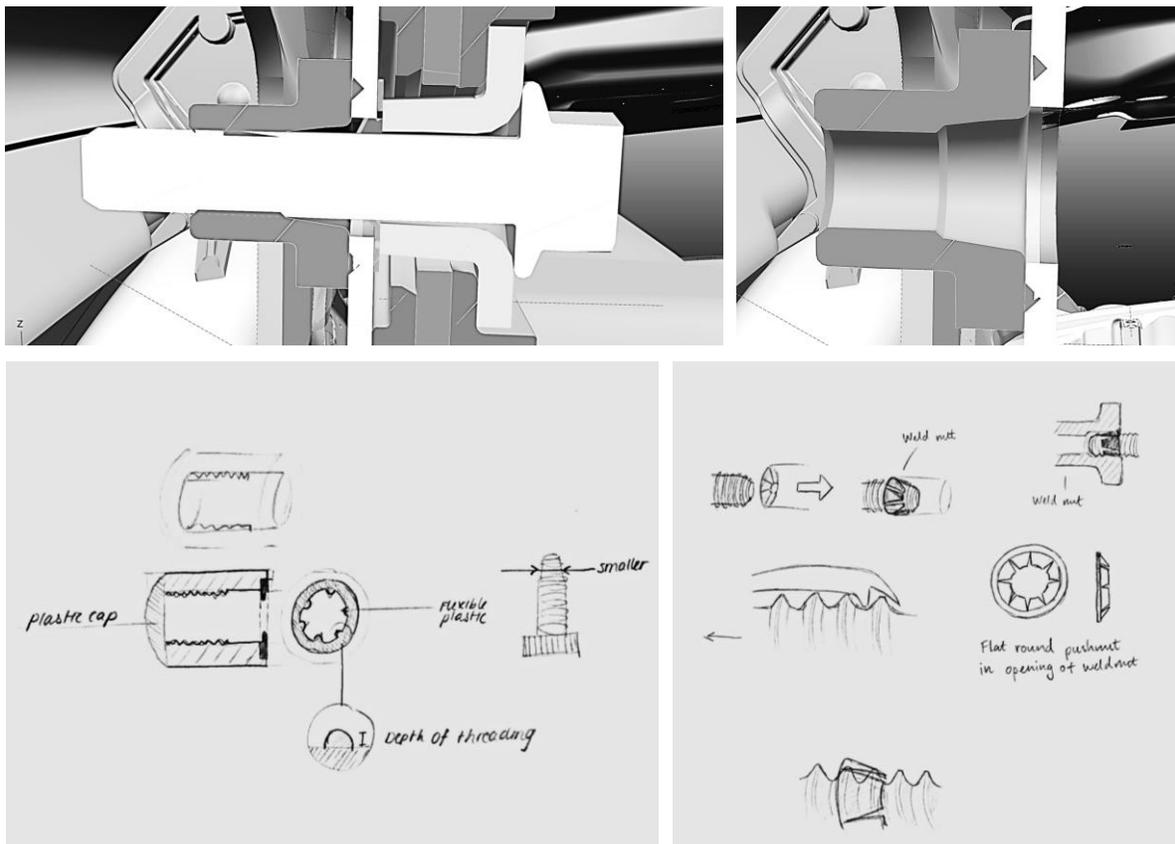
Third-hand integrated in weld nut idea. Top: current weld nut. Bottom: ideas including zip-tie inspired locking systems.
